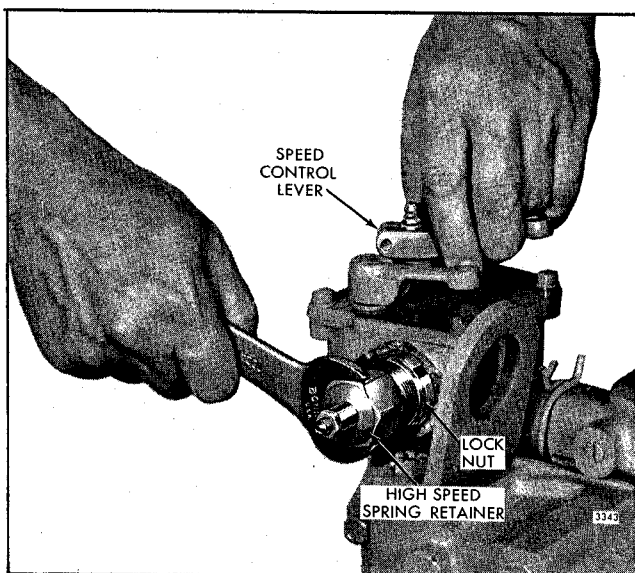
Adjusting Maximum No-Load Engine Speed
